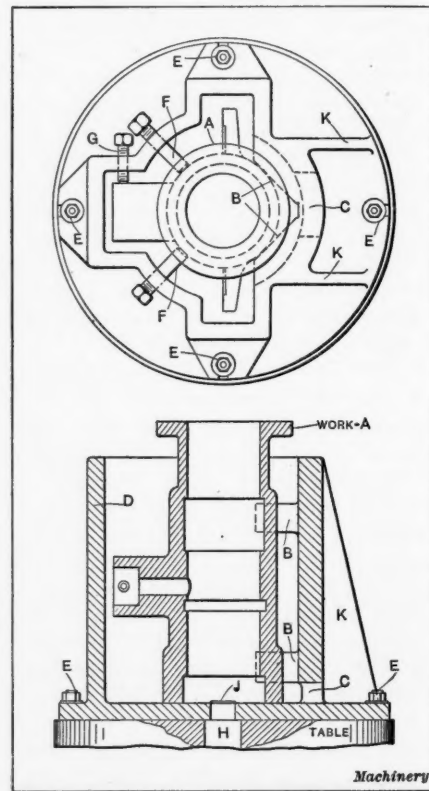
Pot Casting Fixture for holding Irregular Steel Castings on Vertical Turret Lathe
